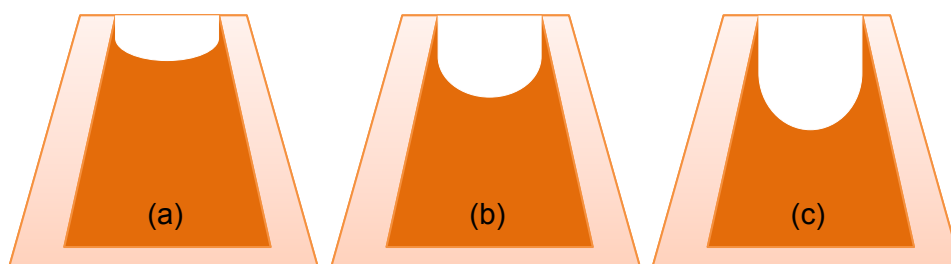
Schematic cross section of specimens after the decored sand removed Al casting (a) one impact (b) two impacts (c) three impacts.
